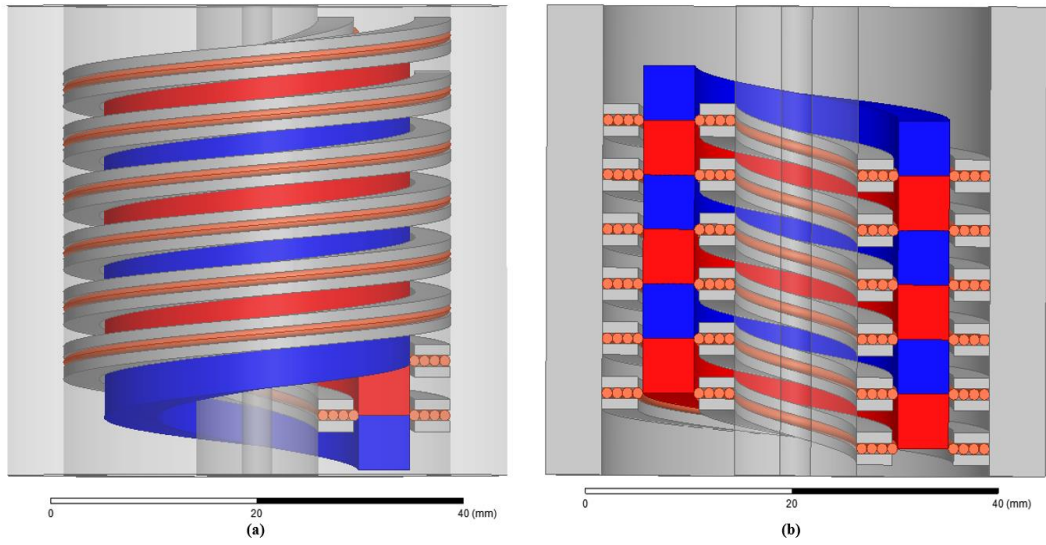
Helical grooves with magnetising windings (a) 3D view, (b) cross section.
